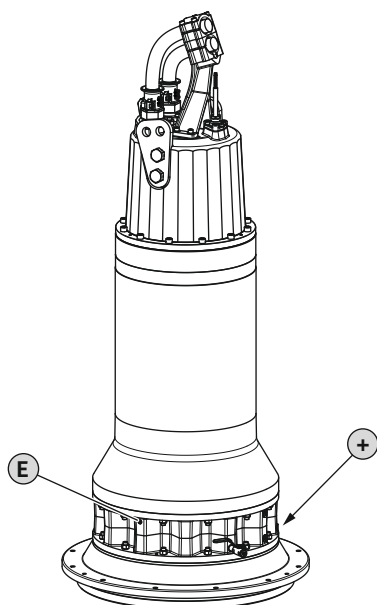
Greasing roller bearings: T 50.1, T 57, T 63.1
